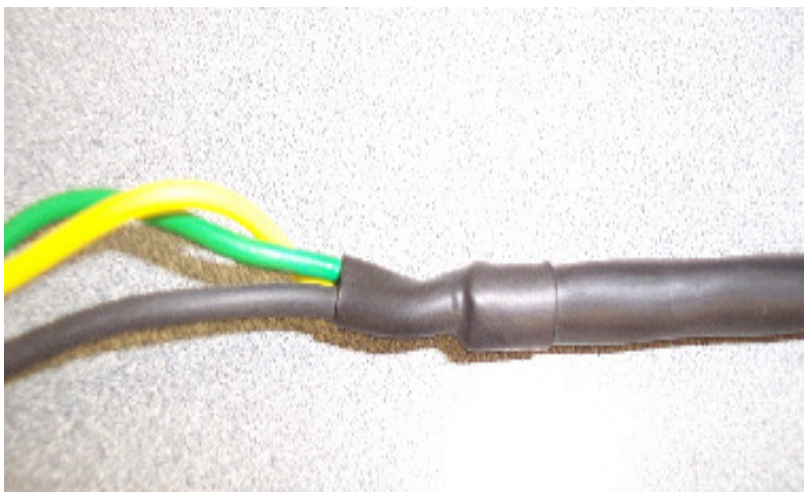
Heatshrink applied where drain wire heatshrink meets cable jacket
